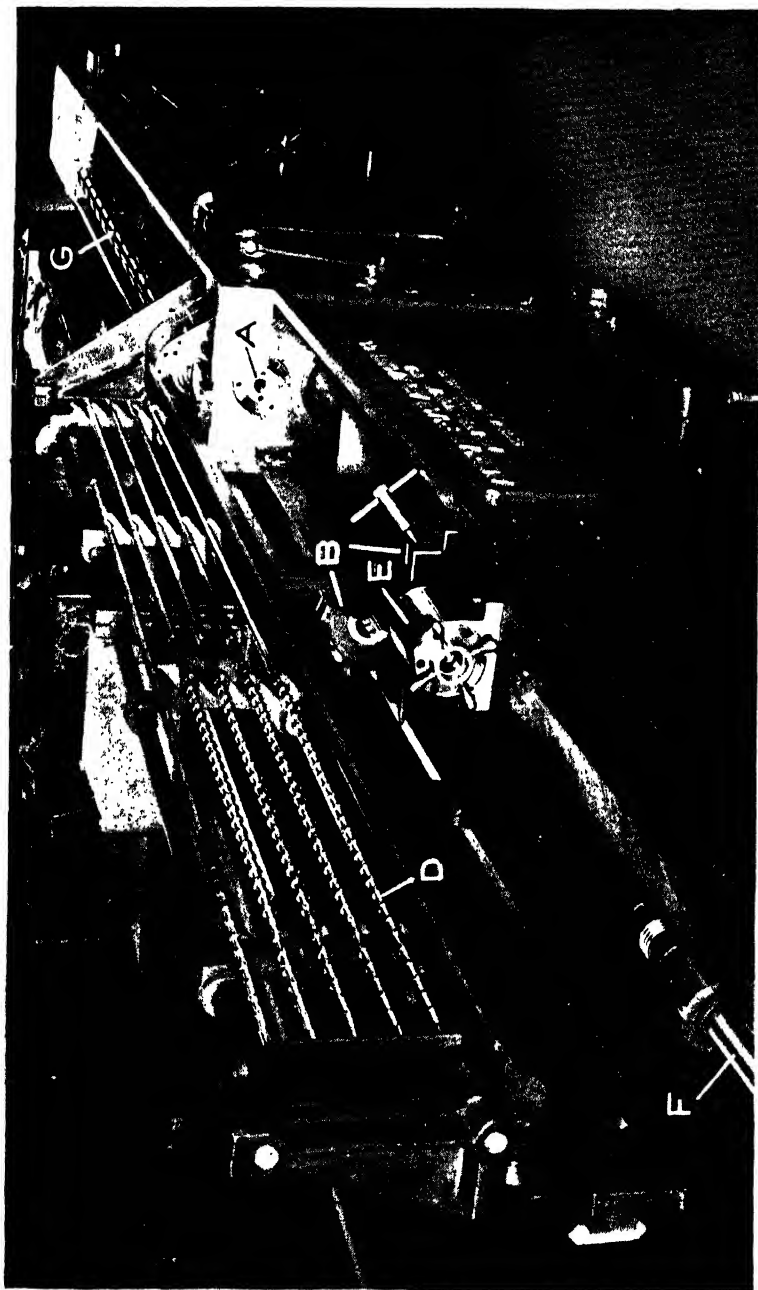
Hydraulic Pull-broach Rifling Machine Equipped for Rifling 20-millimeter Cannon
